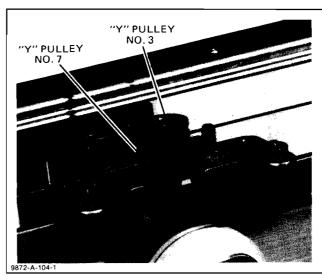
Y Cable Feed Through to Pen Carriage Arm
